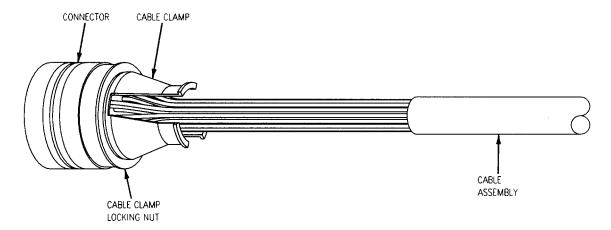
Installing Cable Clamp and Cable Clamp Locking Nut
